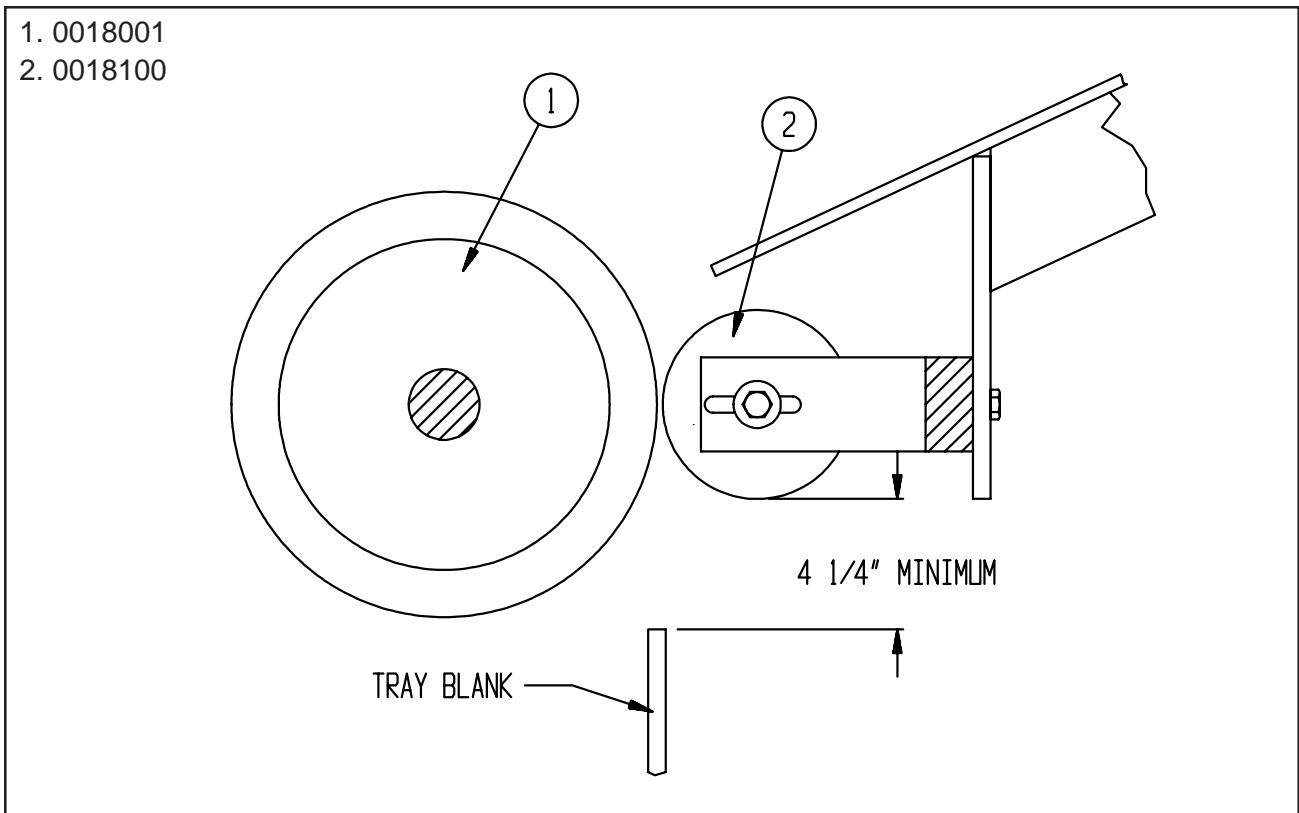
C: Adjust Blank Feed Roll Assembly/ With Blank Rebound Stop
